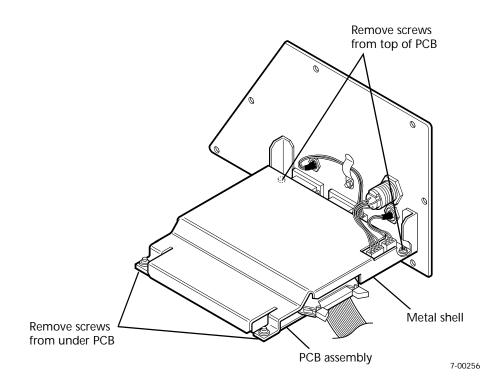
Removing the Communications option PCB assembly from the option plate assembly
